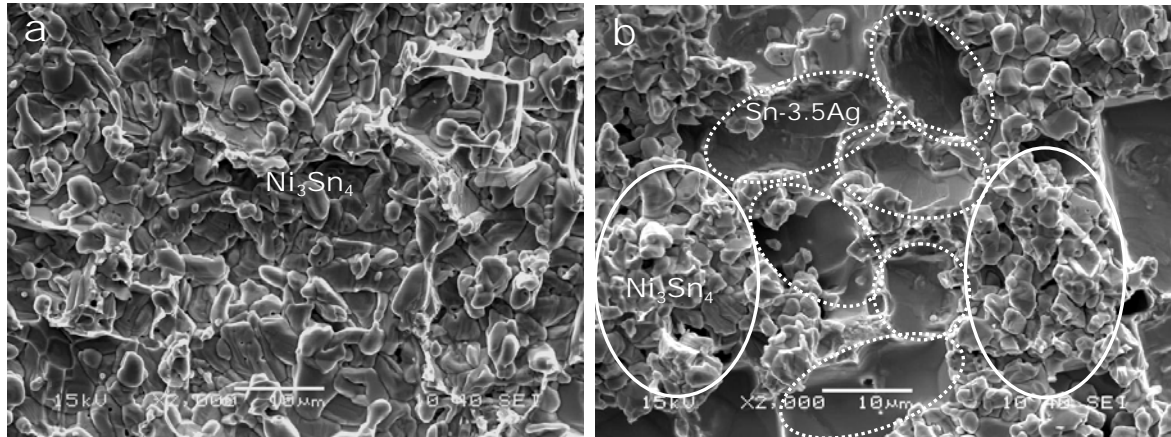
Fracture surfaces of the solder joint aged at 180°C for 48 h showing mixed failure (macroscopically brittle while microscopically ductile) at the interface between (a) Ni_3Sn_4 and (b) solder.
